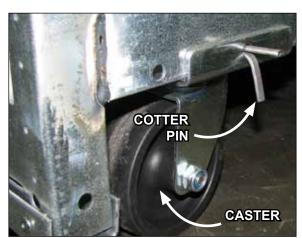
Removing the casters is an easy process. Simply flatten and remove the cotter pins that are holding the casters in place. Then lift the case with a "J" bar and slide the caster assemblies out. The dismantled casters can now be discarded.
